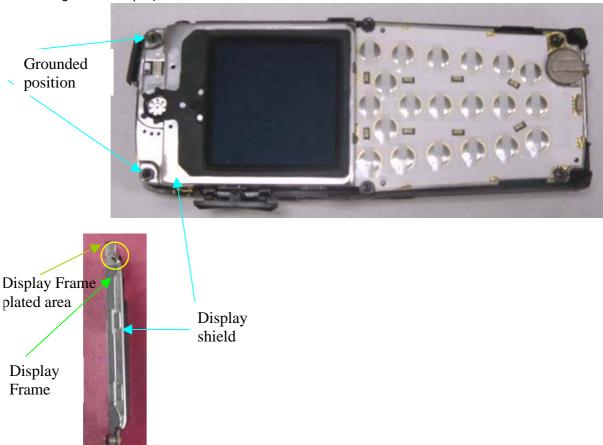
RH-27 display assembly (above, right) and side view of RH-27 display assembly (above, left)
